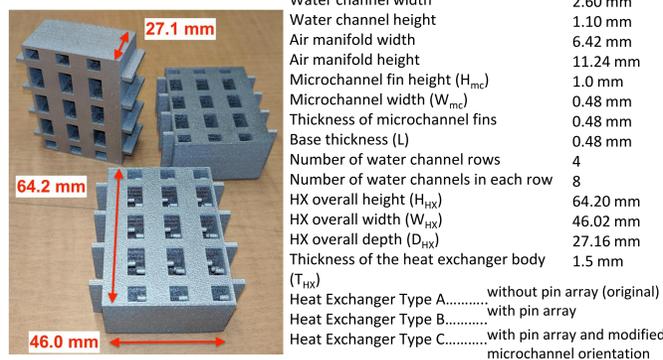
Additively manufactured manifold-microchannel heat exchangers from stainless steel with dimensions.
